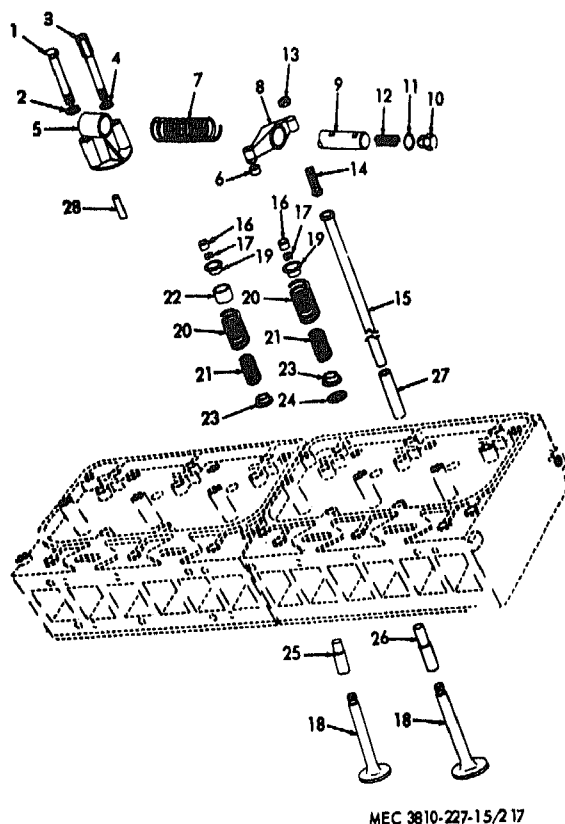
Carrier engine rocker arm and push rod assembly, exploded view.
